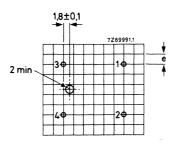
Hole pattern for mounting on a printed-wiring board (component side). Hole diameter $1,3+0,1\,$ mm. $e=2,54\,$ mm $(0,1\,$ in).
